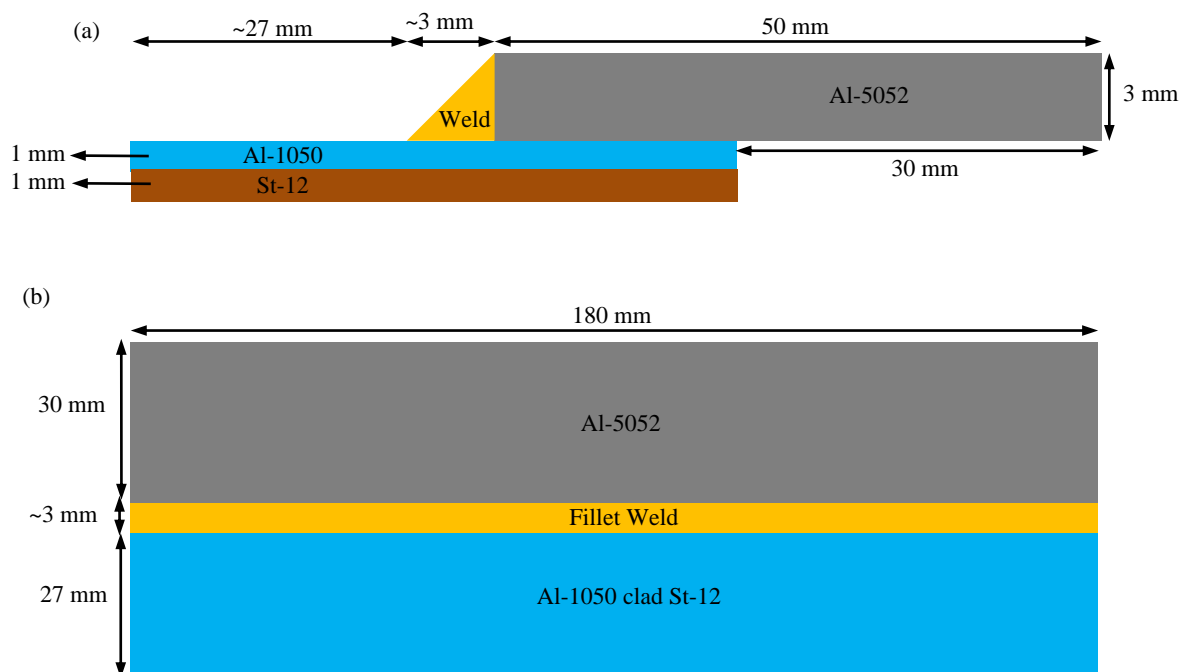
Lap joint configuration and dimensions of the samples, (a) cross section and (b) top view
